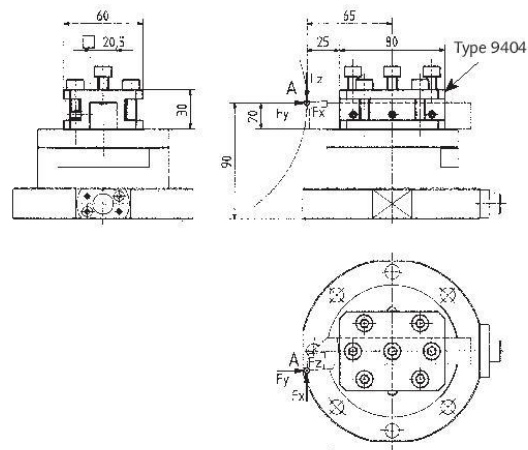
Dimensions Dynamometer Type 9272 with mounted tool holder Type 9404
